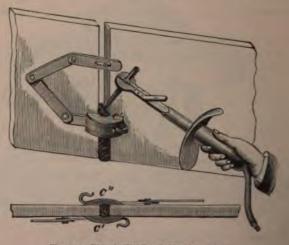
Electric Welding of Two Iron Plates.
